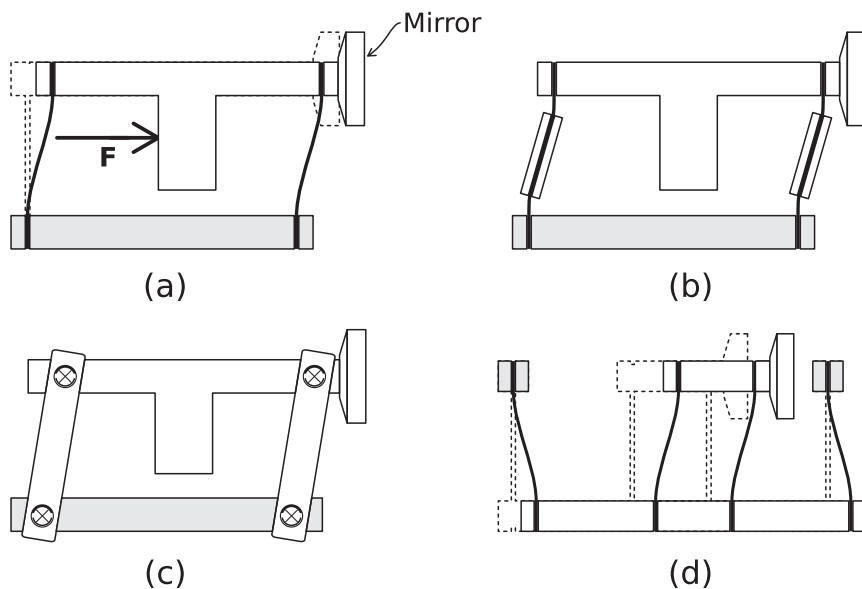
Four porch swing bearing structures. In type (a), flexures are parallel flat springs, which can be stiffened using clamps, as in (b). The third typical way, (c), is to use flexure pivots. Porch swings can be cascaded in series, as in (d), which completely removes the vertical motion. The grayed parts are fixed. Figure is partly reproduced from [68].
